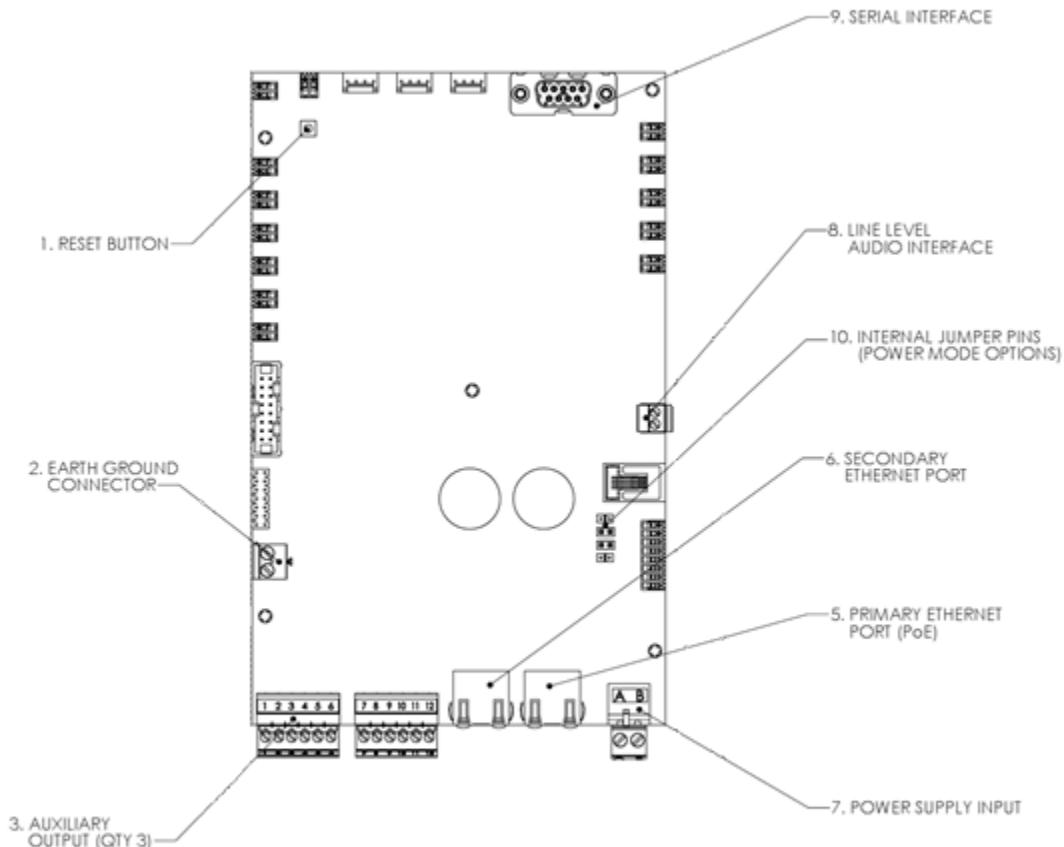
Internal Printed Circuit Board (PCB) view showing various connectors
